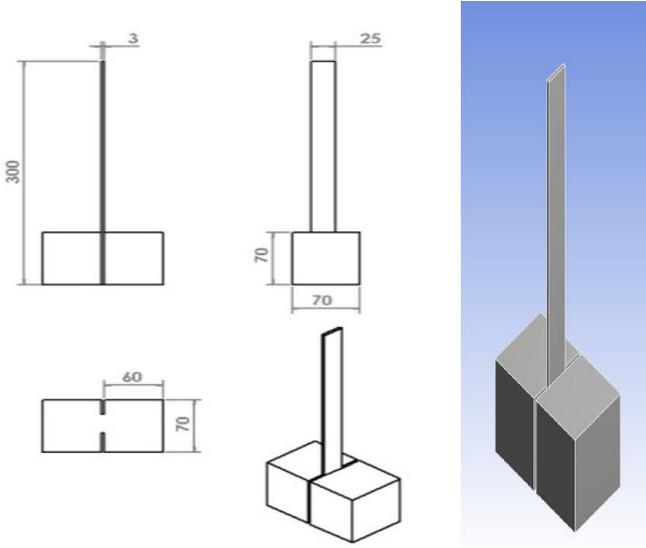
Dimension of the Tuned Mass Damper and its isometric view
